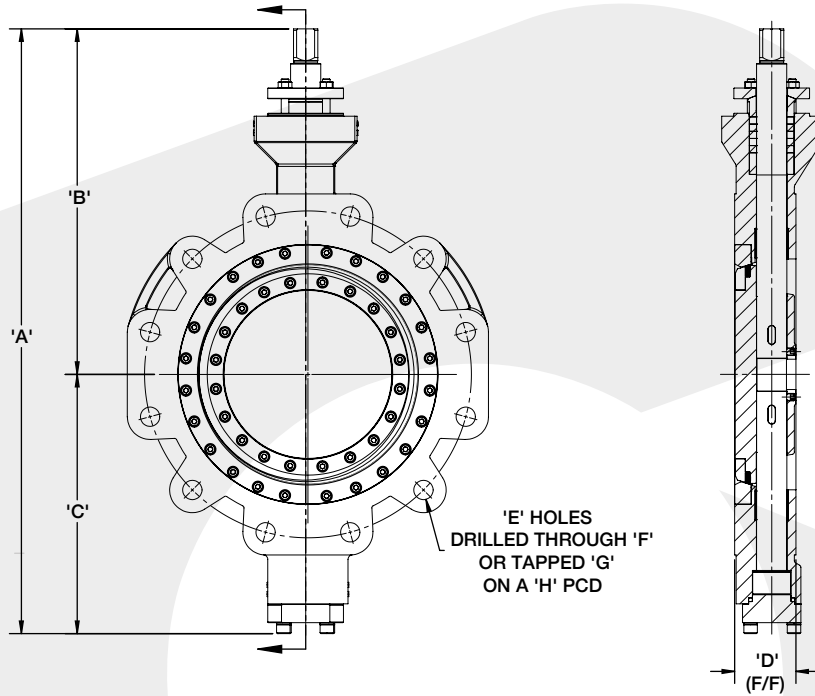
Bare stemmed GA drawing, Triple-Offset Lug-Type flat-face (BU05).
